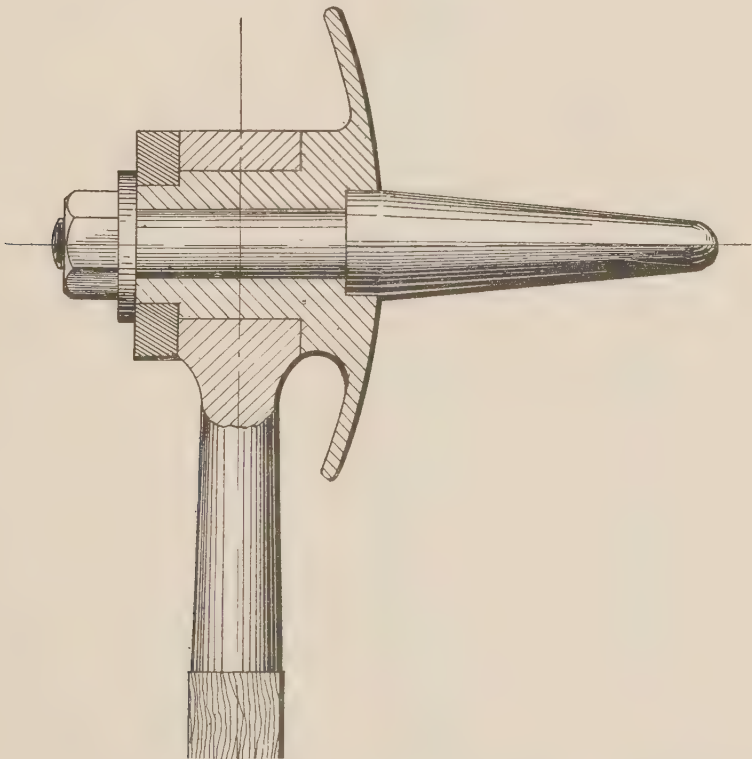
“DULKEN” ROTARY MOUNTER PIN FOR BELT POLE.
